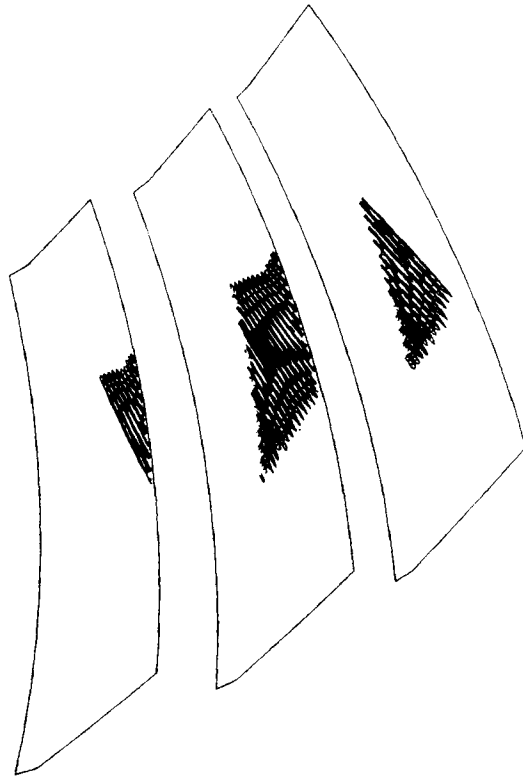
The locus of the contact zone as the gears roll against each other for a gear torque of 960 in-lb
